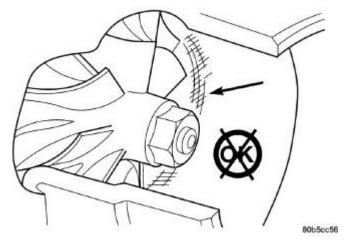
Inspecting Compressor Housing For Impeller Rubbing Condition Courtesy of CHRYSLER GROUP, LLC
